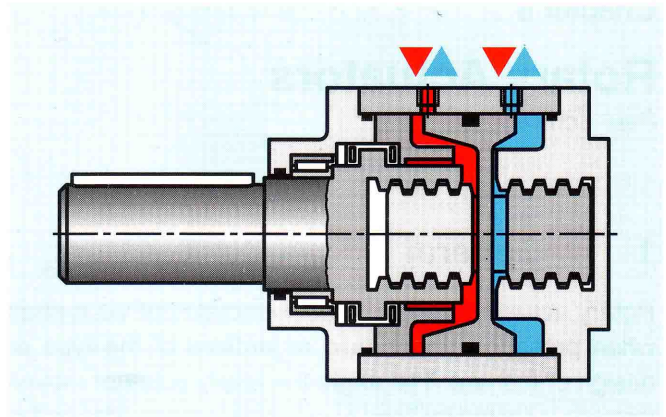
Rotary piston/rotary actuator with drive pivot operated by means of a thread
